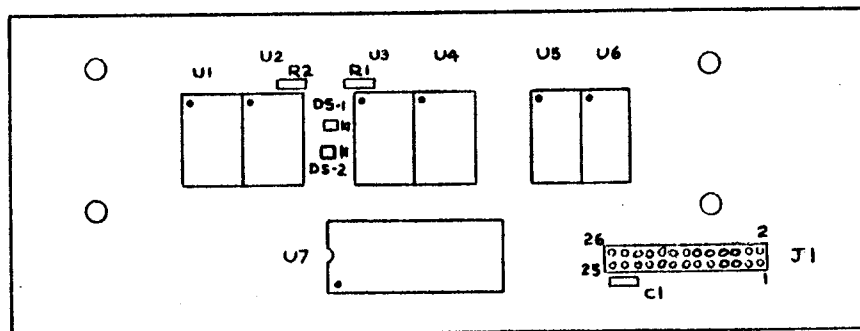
ASSEMBLY DRAWING - DISPLAY ASSEMBLY
